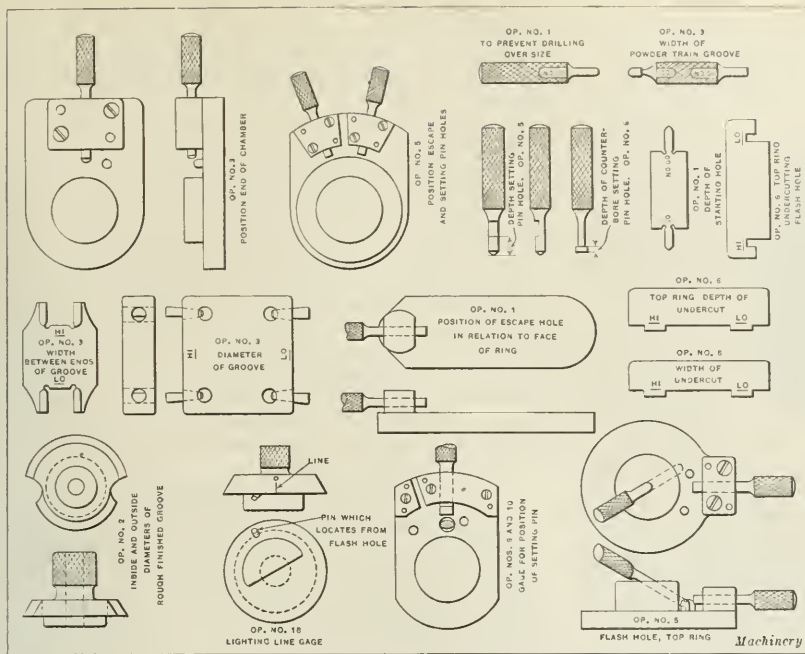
Miscellaneous Examples of Gages used in testing Fuse Parts
